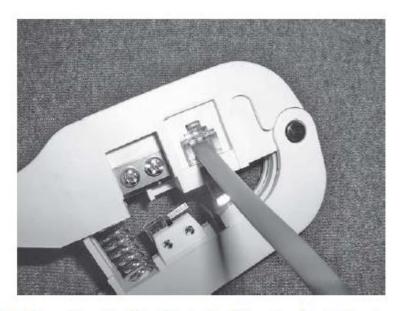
■ Inserting the Cord into the Plug for the Crimping Process
